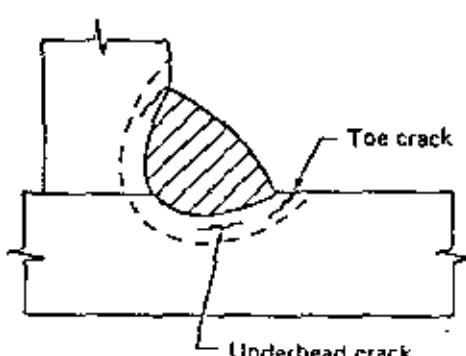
Underbead cracking and toe cracks caused by hydrogen pickup in heat-affected zone of plate.
